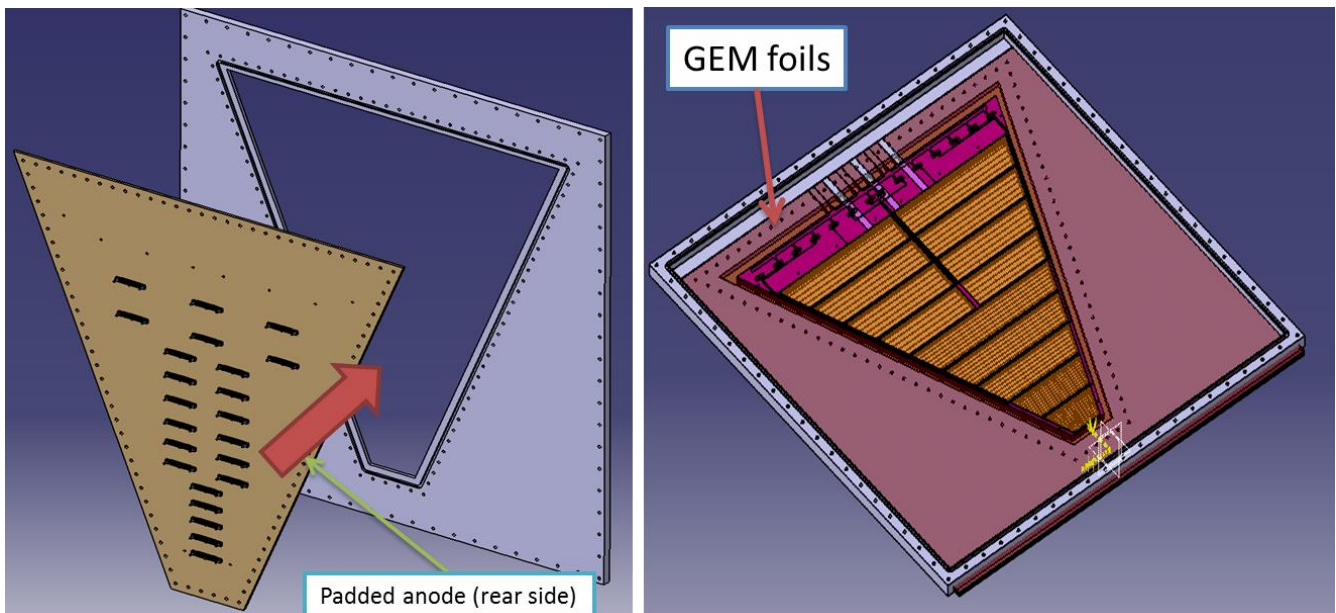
CAD model representing the assembly procedures of the tripleGEM. The padded anode is bolted to the detector box lid, and the 3 GEM foils are stacked on the padded anode using some alignment holes.
